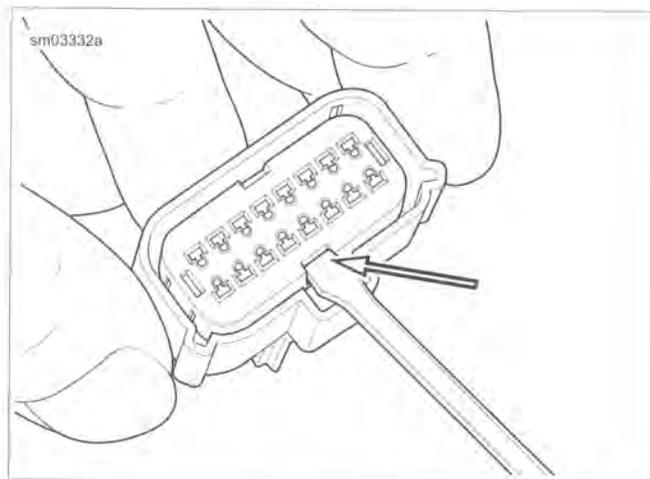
Secondary Lock Pry Slot (Socket Housing)
